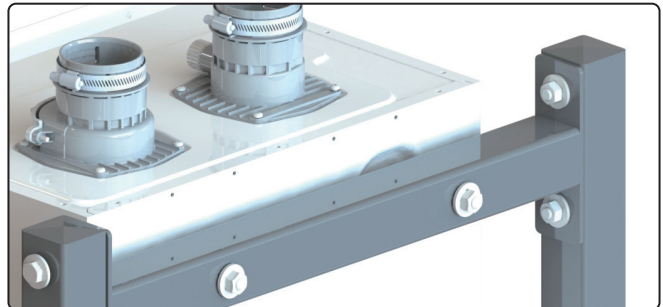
Single Appliance Mounted on Top Mounting Bracket
